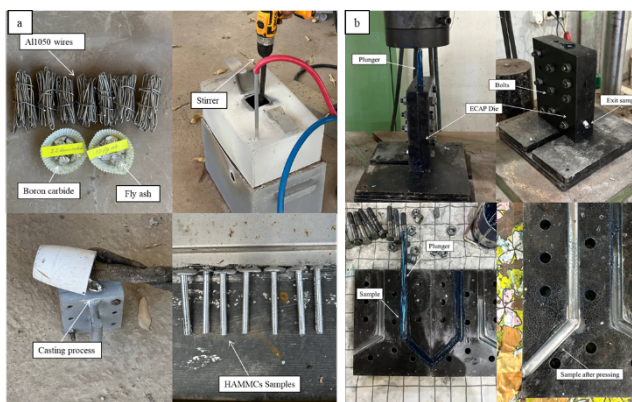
(a) Stir casting setup and (b) ECAP setup
